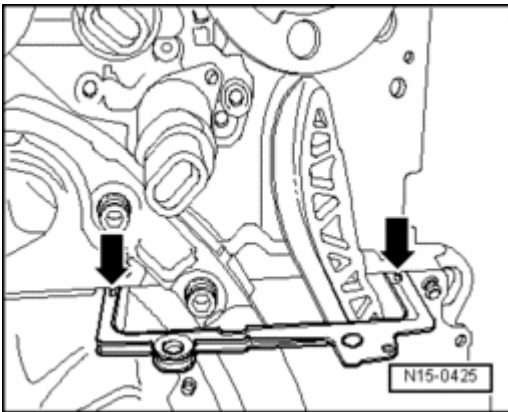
Locating 3 mm Holes In The Cylinder Head Gasket
